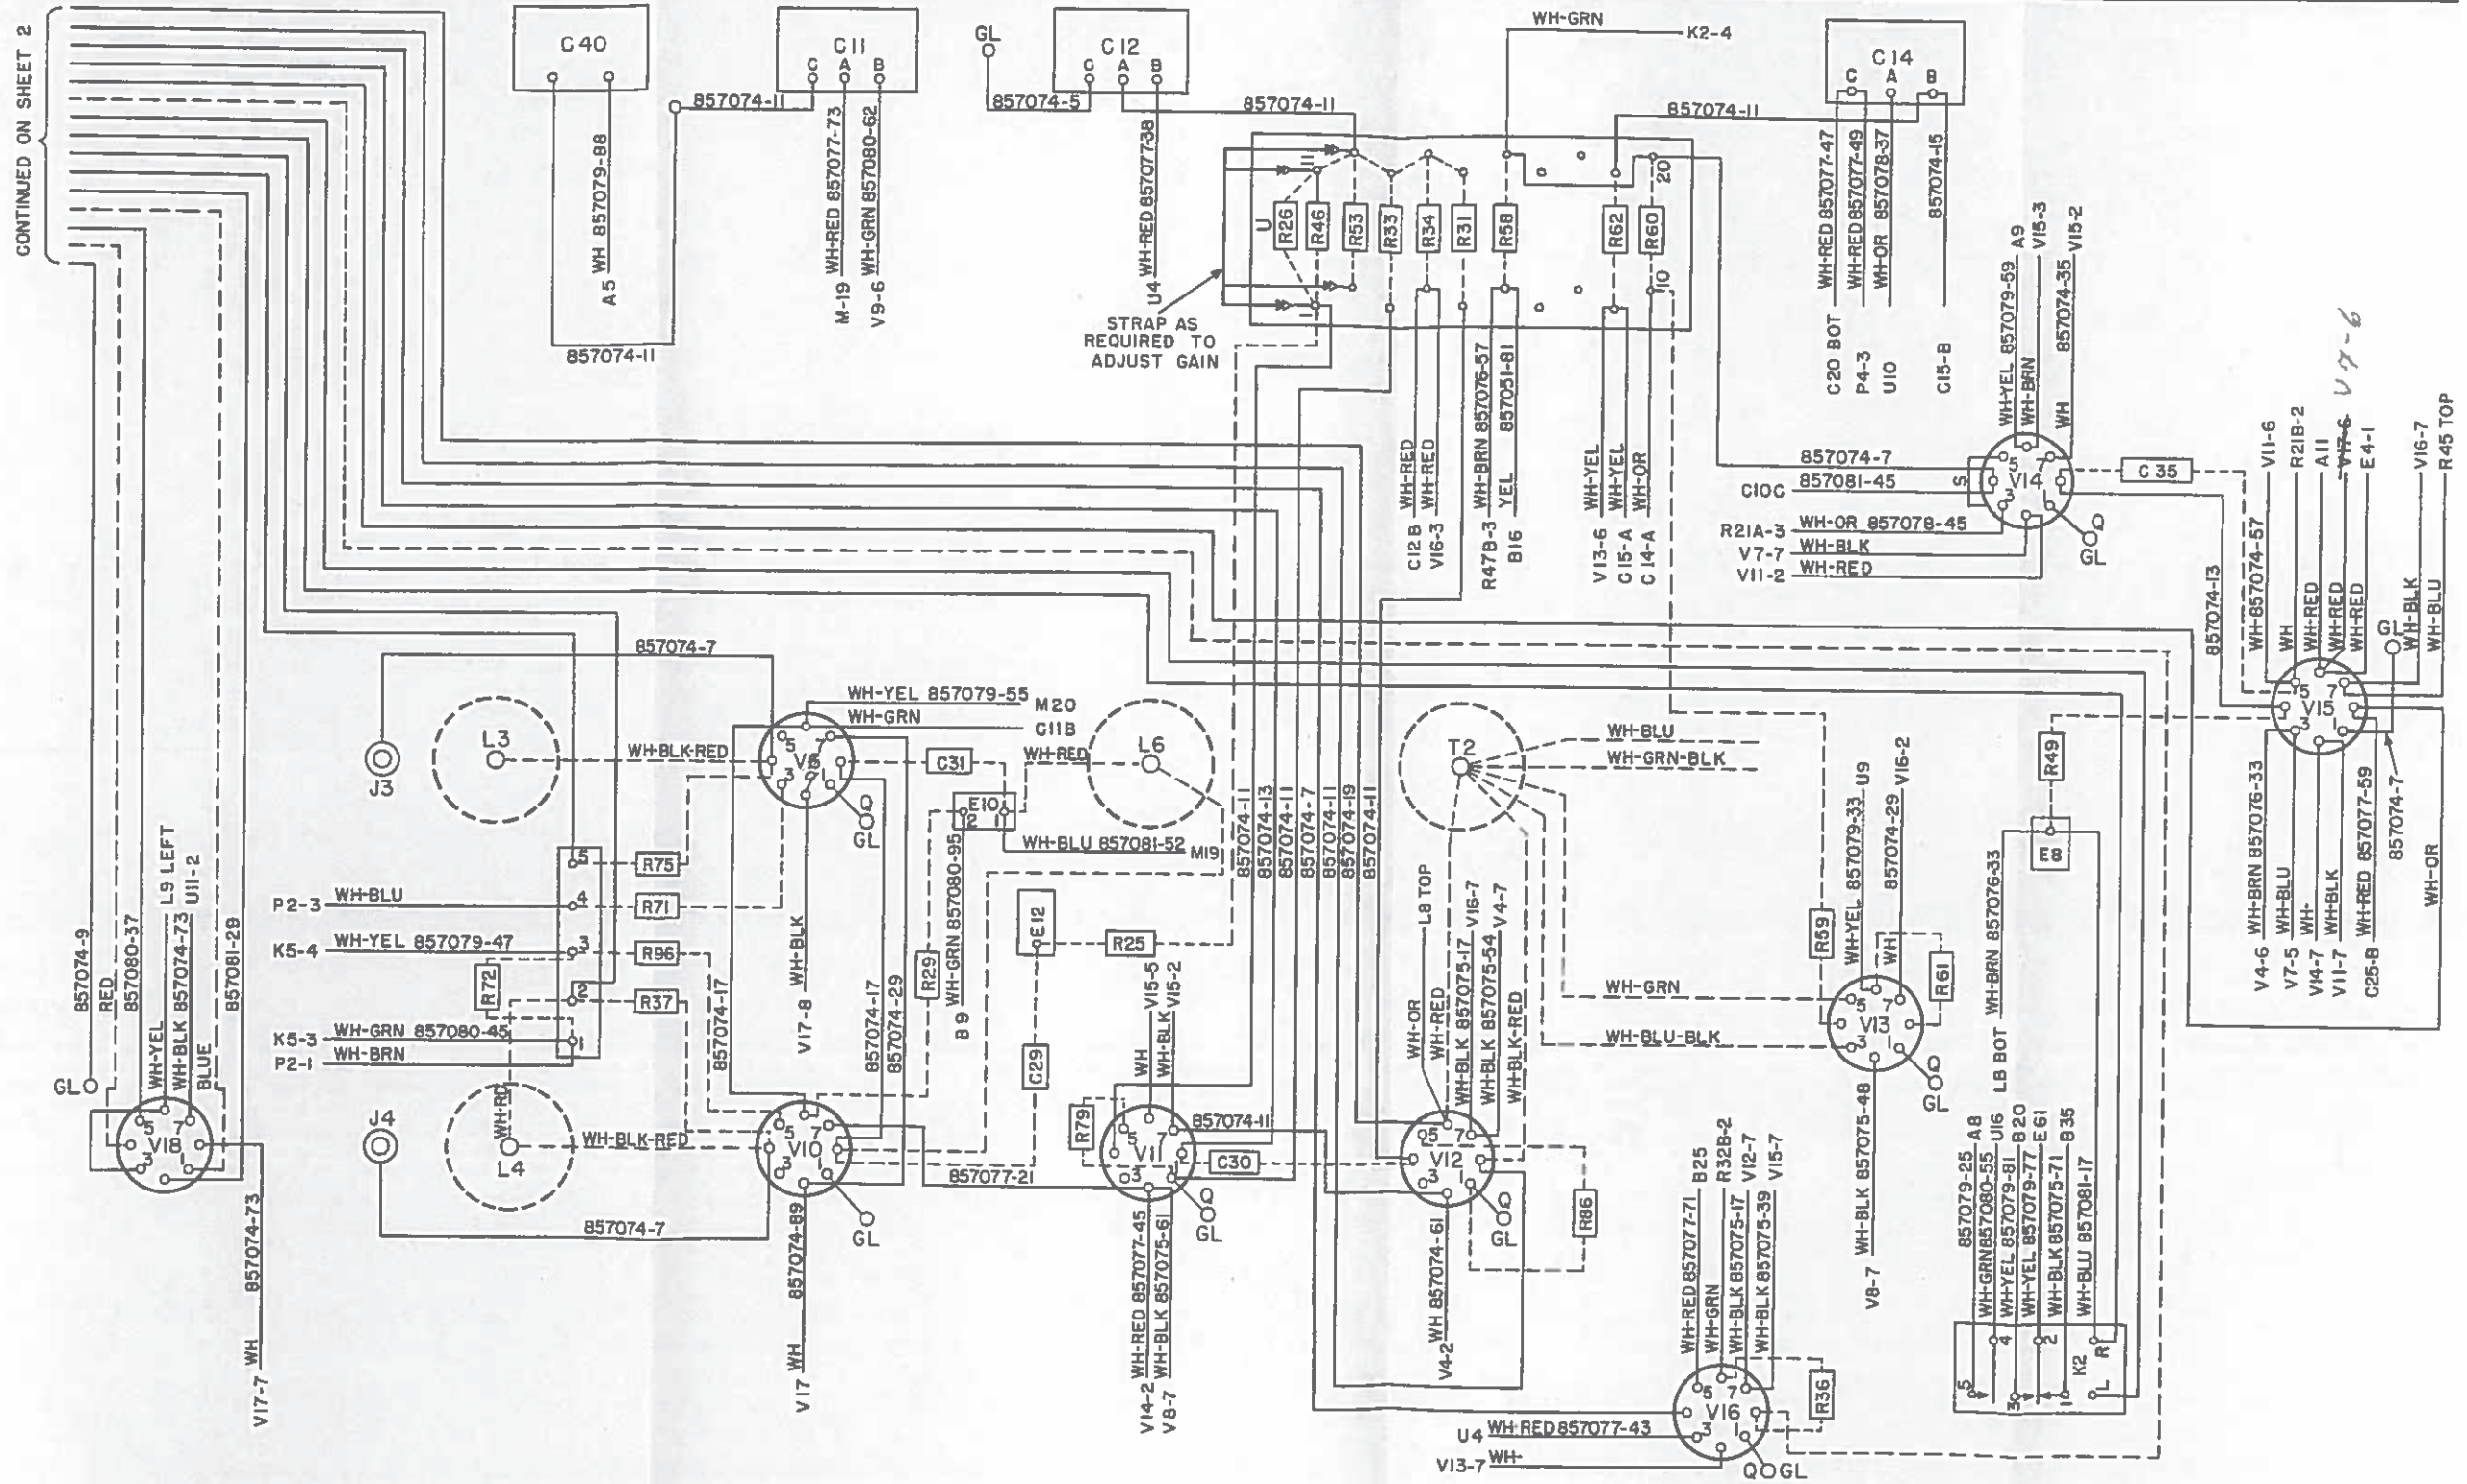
Control Panel Assembled Wiring Diagram (Sheet 3).
